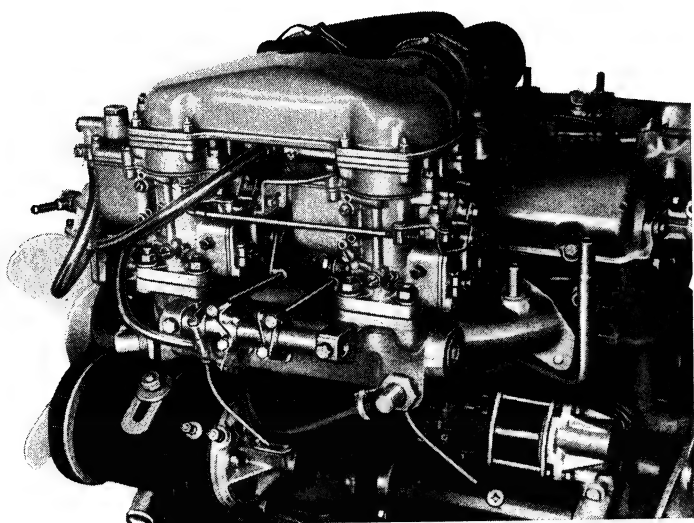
Weber carburetors in place on engine 118 B.000.
